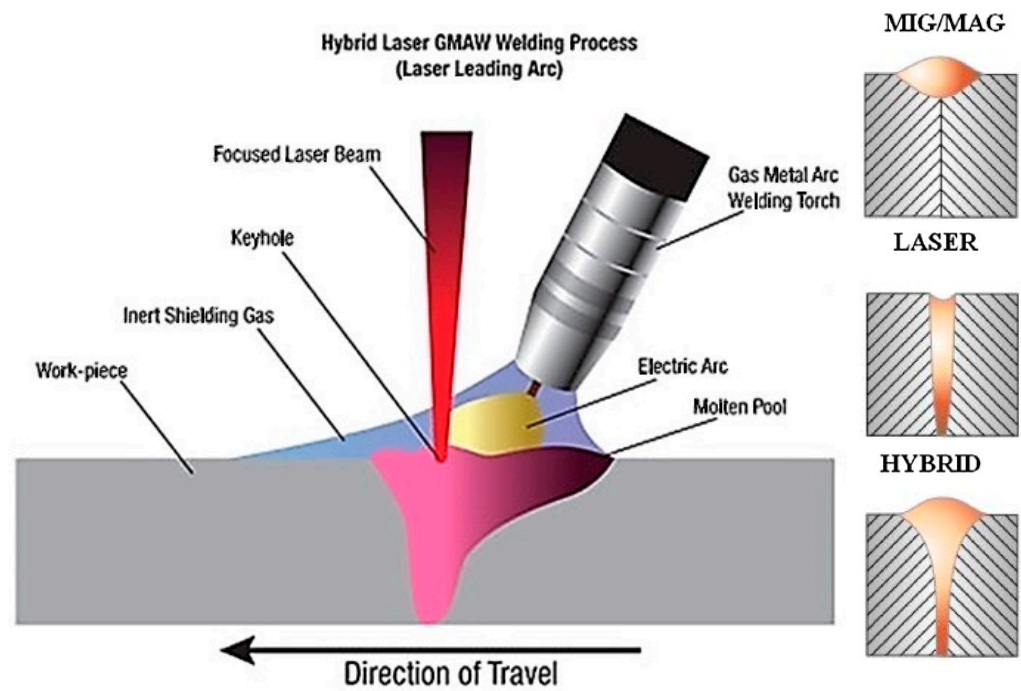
Schematic diagram of laser arc hybrid welding (source: Lincoln Electric) and the weld bead patterns for MIG/MAG welding, laser welding and hybrid welding. Reproduced with permission from [114], Elsevier, 2018.
